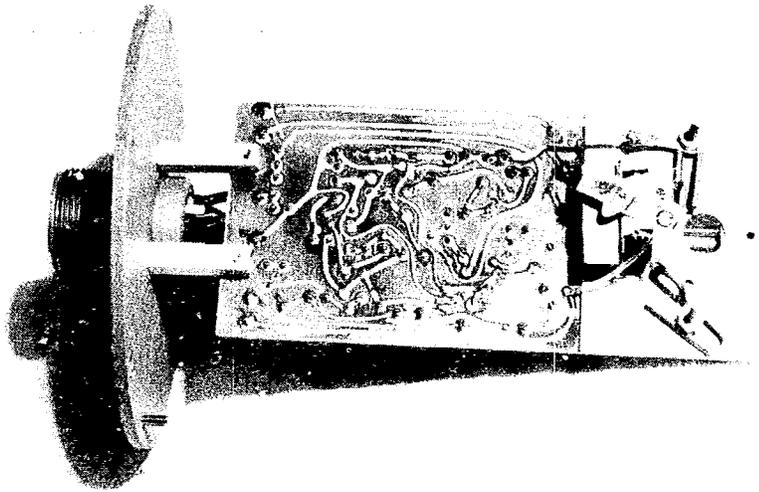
HP-R-213 DETECTOR P.C. BOARD FOIL SIDE
